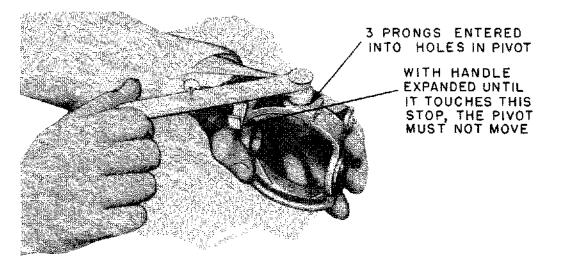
CHECKING TO INSURE THAT THE AIR FIVOT FITS TIGHTLY IN THE RECESS
